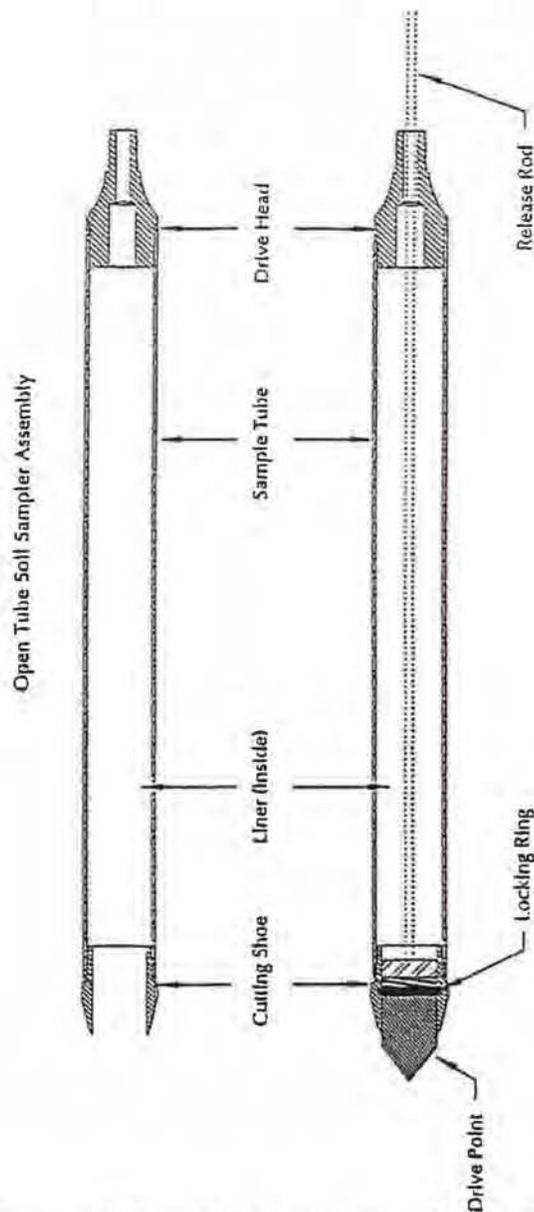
(A) Open and (B) Closed Piston Sampler Assembly, Single Tube System
